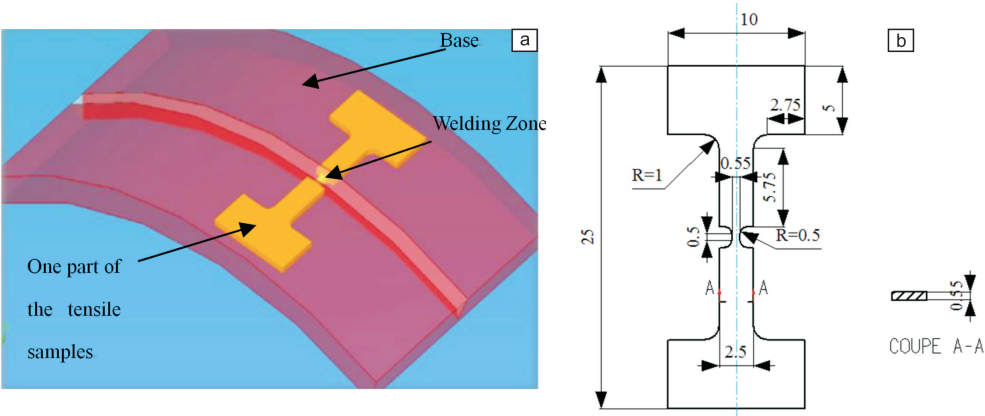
Schematic figures for laser welding procedure(a) and the geometry and dimension (b) of the specimen used for *in-situ* tensile work
